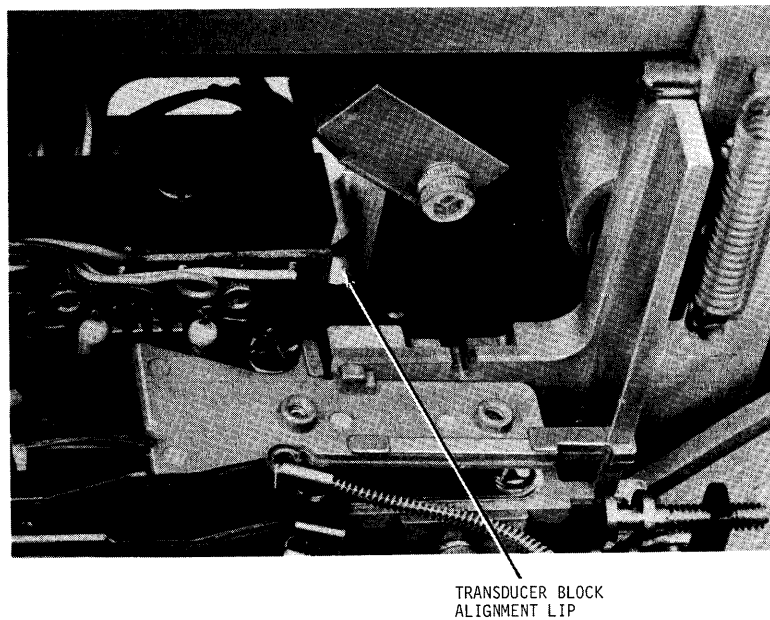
Optical Positioning Transducer Removal and Replacement
